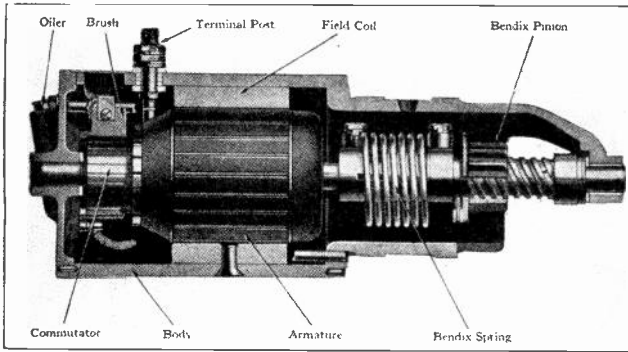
Sectional view of an automobile starting motor showing commutator and brushes on the left and Bendix drive on the right. Examine this figure carefully while reading the explaining paragraphs.
